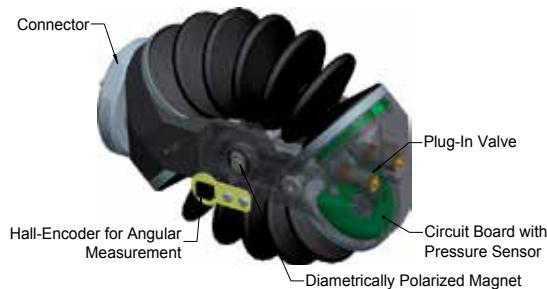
Highly Integrated Flexible Fluidic Drive Module
